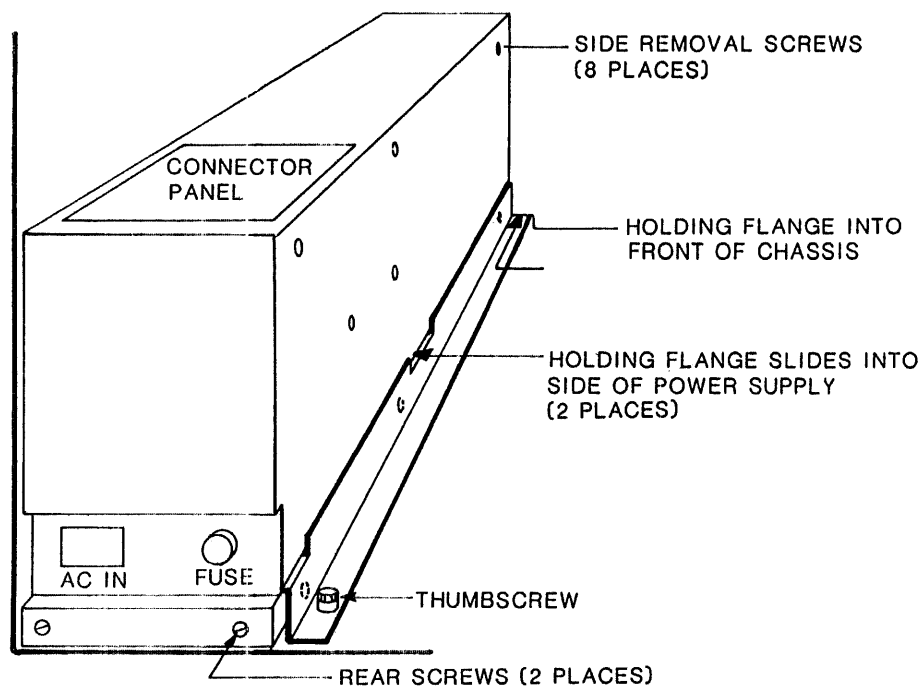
POWER SUPPLY DISASSEMBLY
